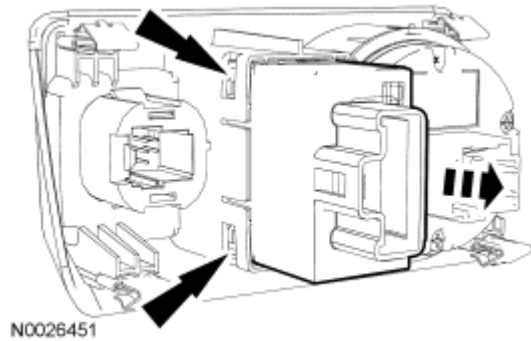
Releasing Tabs & Removing Instrument Panel Dimmer Switch
